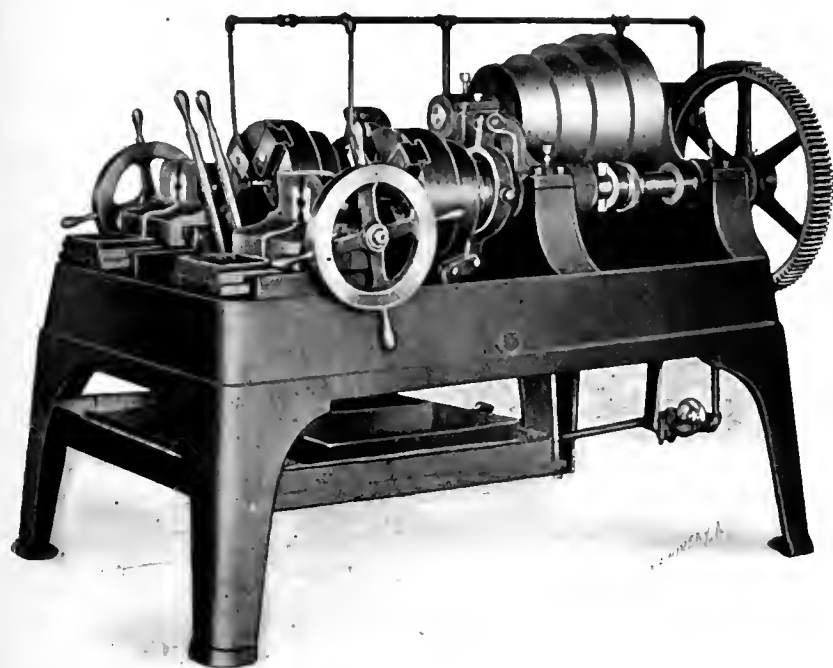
Murchey No. 2 Pipe and Nipple Threading Machine equipped with Improved Opening Die Heads
